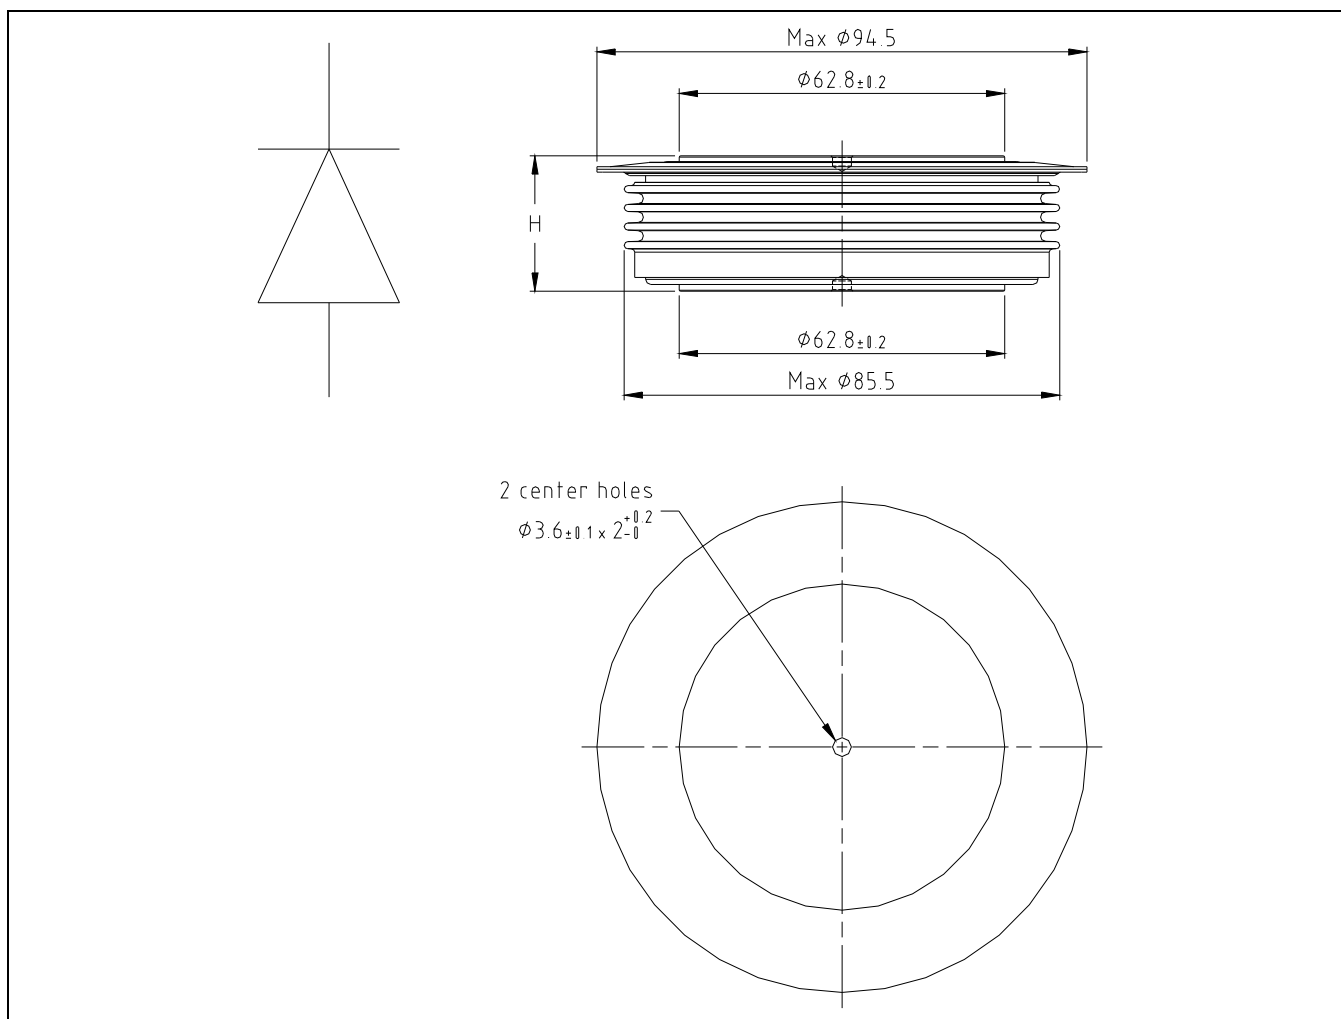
Outline drawing, all dimensions are in millimeters and represent nominal values unless stated otherwise
